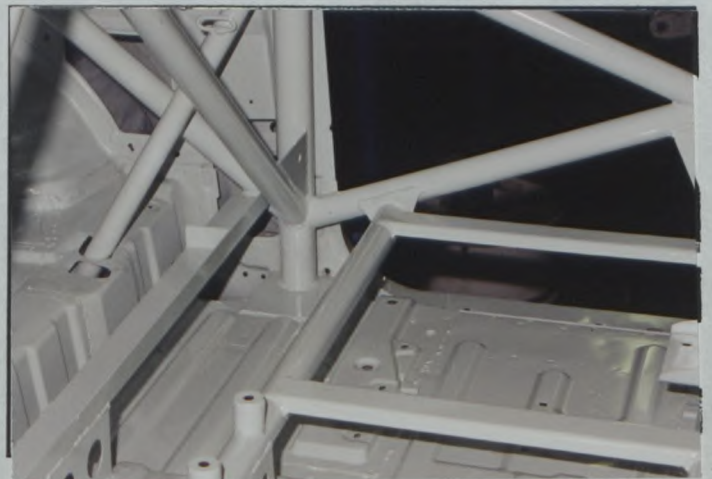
MAIN HOOP TO FLOOR-RIGHT
